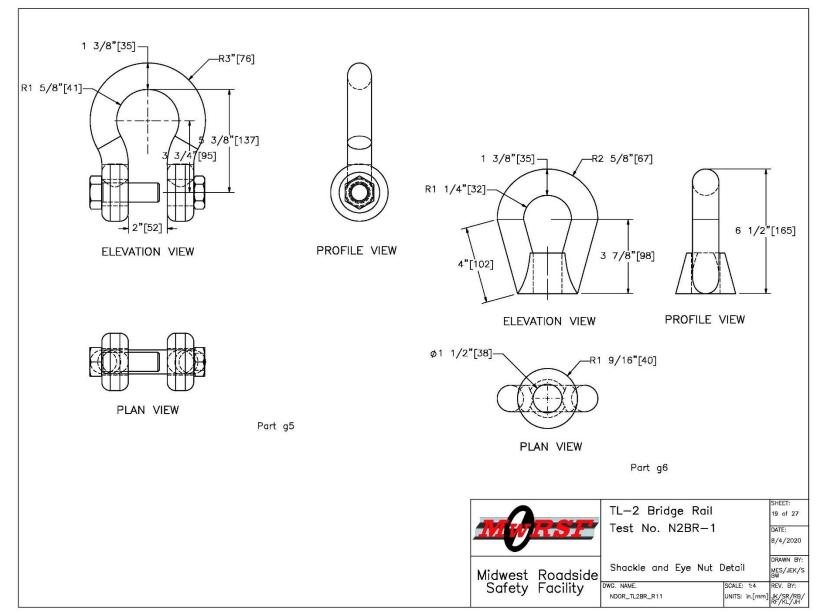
Shackle and Eye Nut Detail, Test No. N2BR-1
